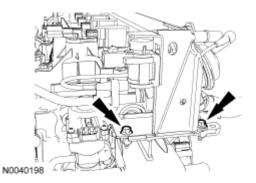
Locating Pump Assembly Bolts Courtesy of FORD MOTOR CO.
